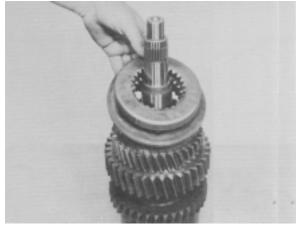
Install 2nd & 3rd speed synchronizer assembly and 3rd speed synchronizer cup.
